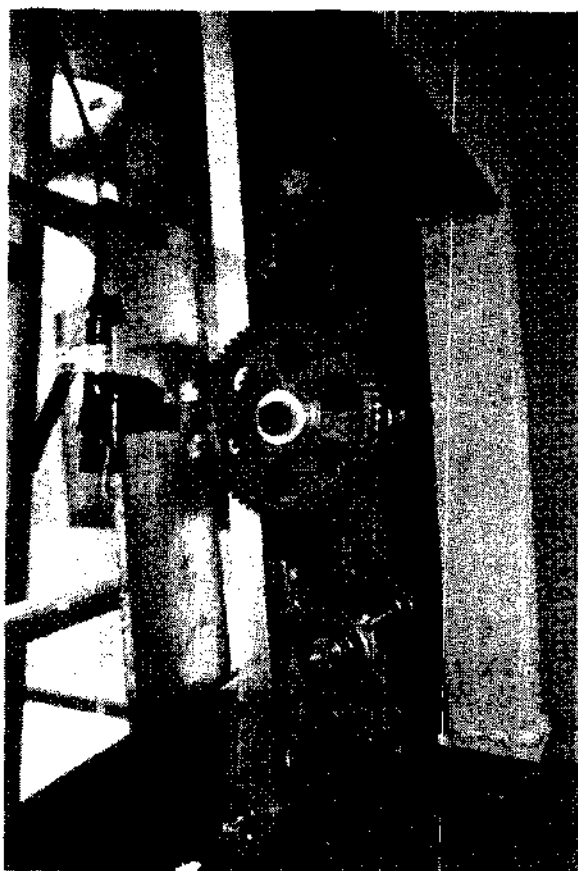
Idle-Side Assembly and RPM Timing Gear
